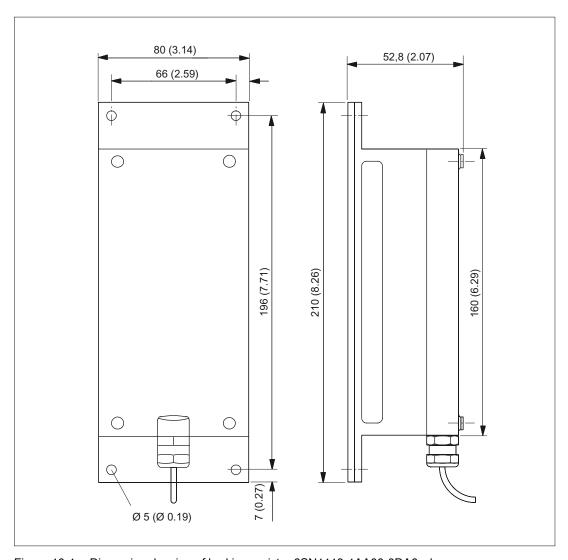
Dimension drawing of braking resistor 6SN1113-1AA00-0DA0 where P_n/P_{max} = 0.3 kW/25 kW, all dimensions in mm and (inches)
